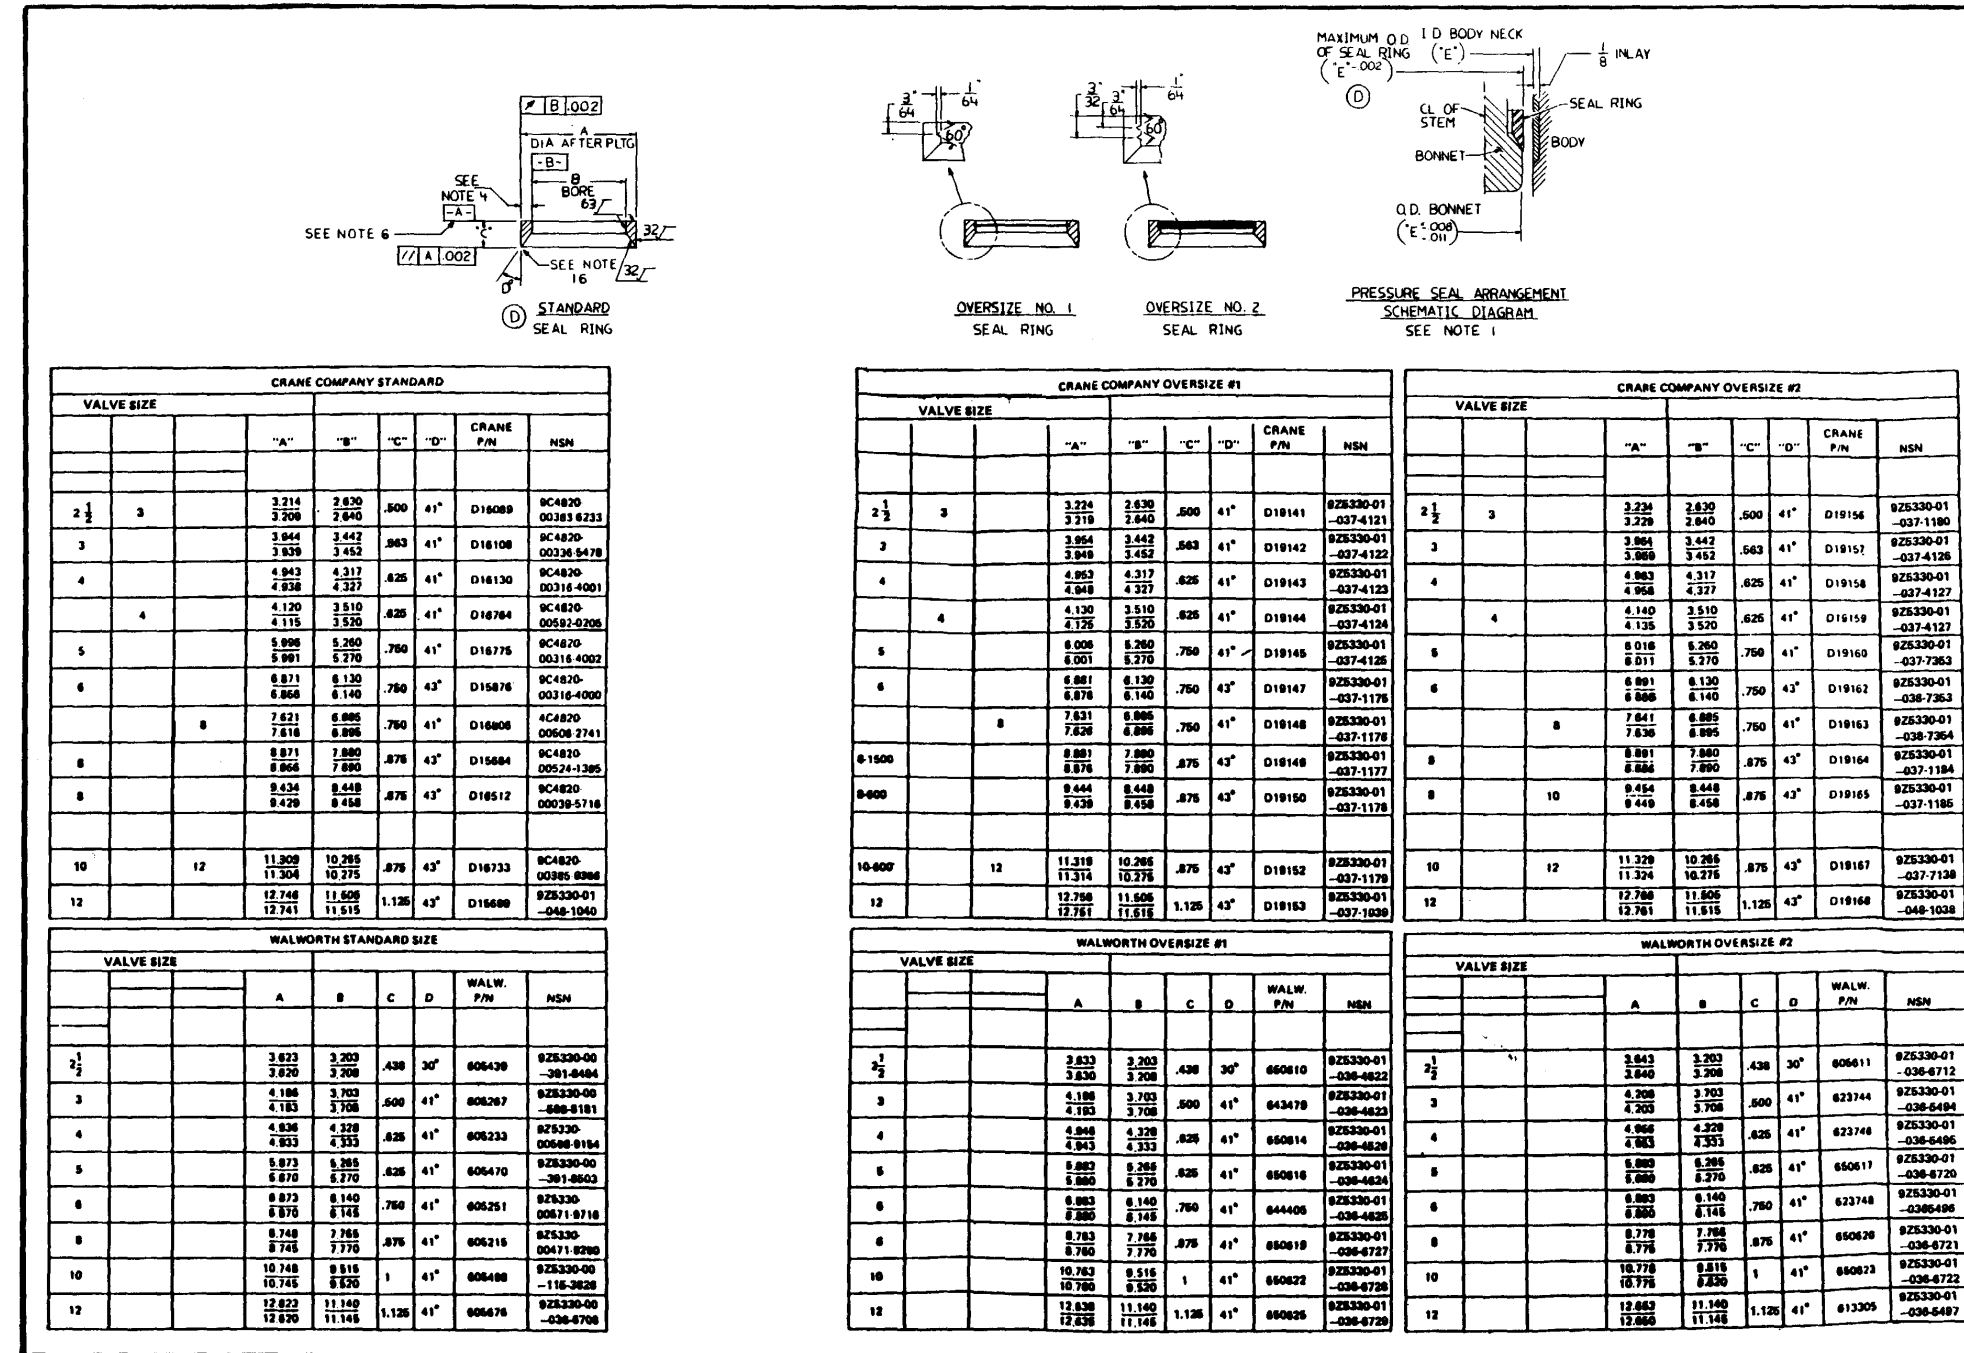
Pressure Seal Ring, Standard and Oversize (Sheet 2 of 3)
